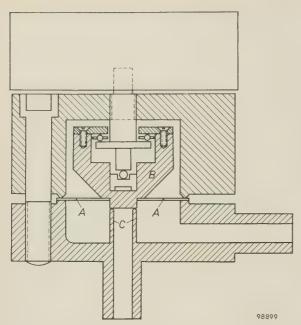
Small all-metal valve. A diaphragm, B copper block that can be pressed against steel tube C.
